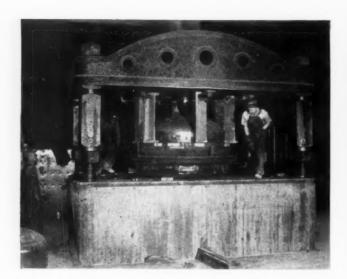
Lower die forces plate through the upper ring die to form the head. The die at the top of the press forms flanged-in manholes
